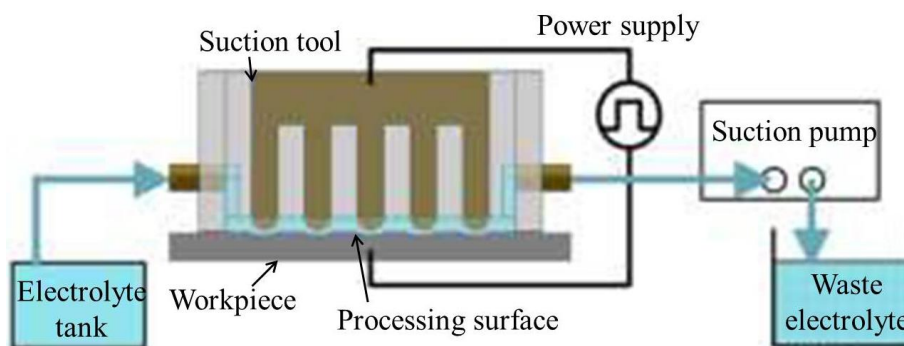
Schematic of oil pockets processing with suction tool. [62]
